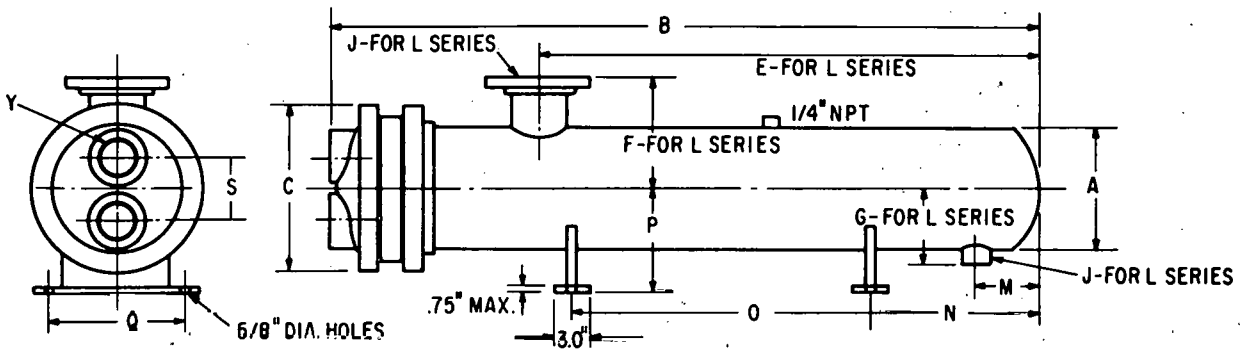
Typical Shell-and-Tube Heat Exchanger
